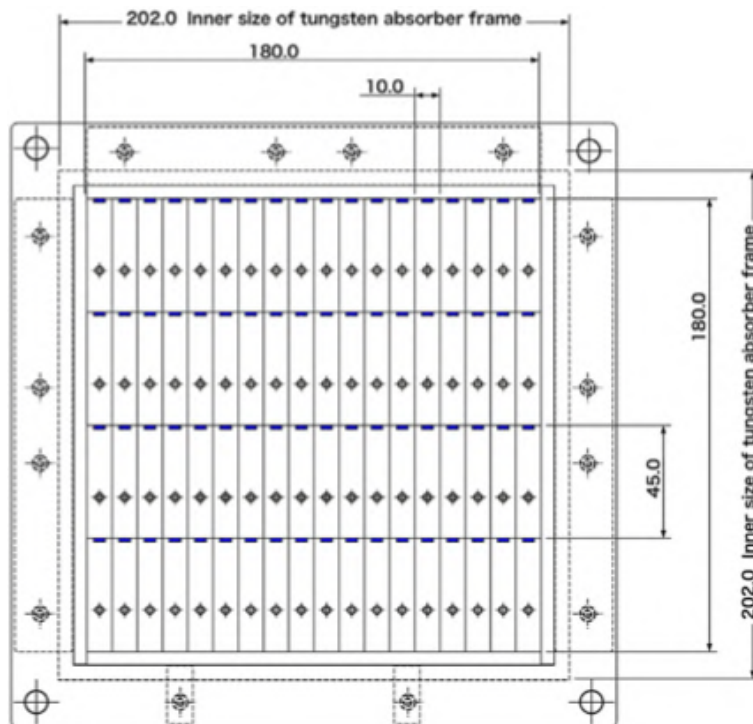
The arrangement of 72 strips in a scintillator layer [26]
